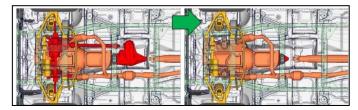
2014 Chevrolet Silverado 1500 with the Front Wheel Drive Components Shown in Red.
